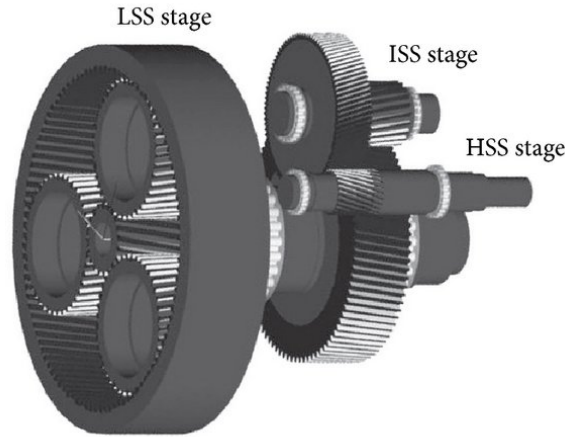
Wind turbine gearbox arrangement. Adapted from [46].
